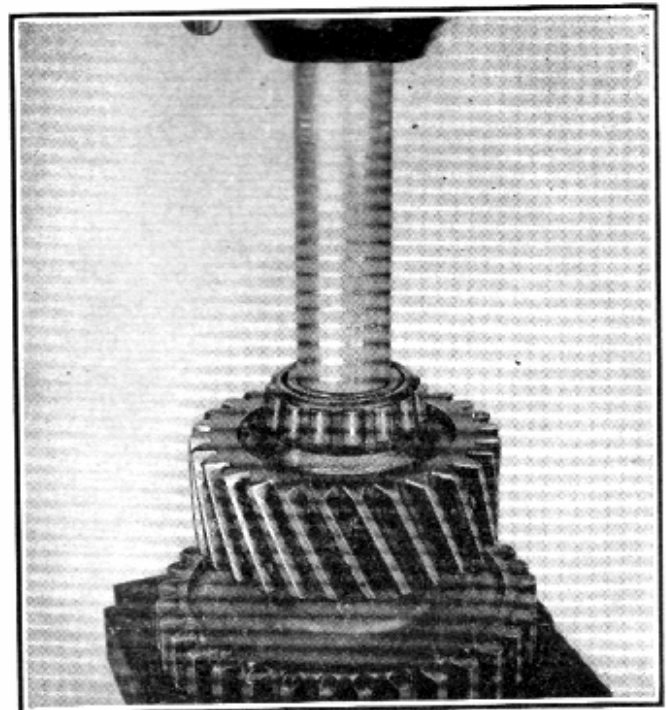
Installing Idler Shaft Bearing, Tool No. J-1718
